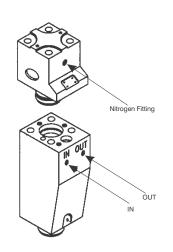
AR 62. Ports on Cylinder Head & Cylinder Body
